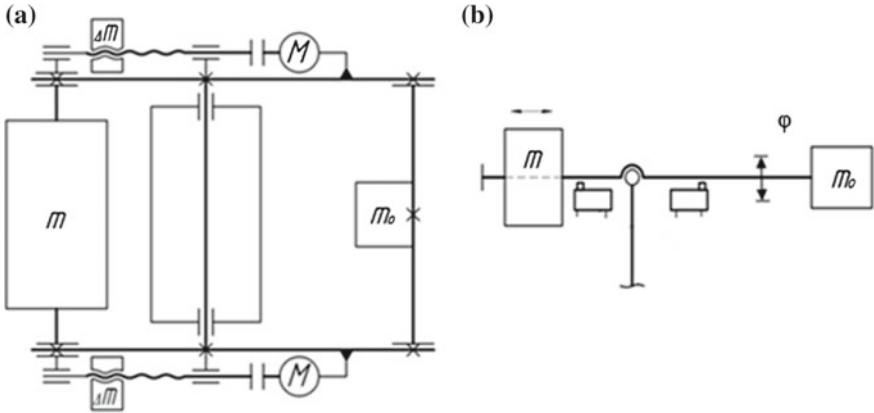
Device for automatic balancing of rod swinging rotors with screw mechanisms: a automatic balancing using counterweights drive Δm ; b diagram of limit switches installation at automatic balancing
